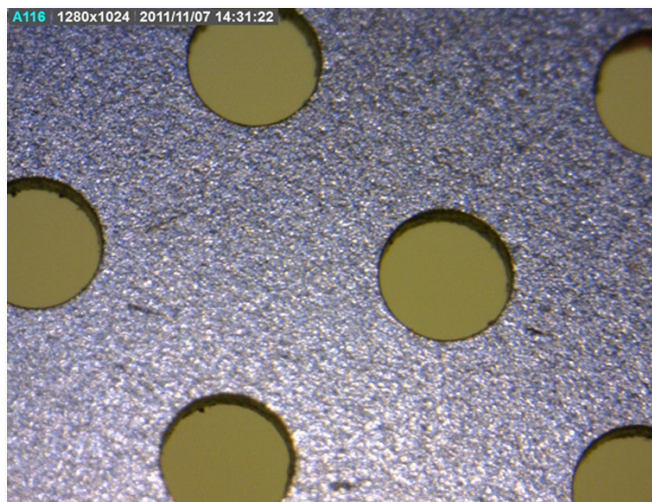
Example of stencil cut on a modern fiber laser stencil cutter.
